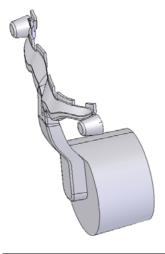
Warpage of the runner. The runner may break from the thick, but still warm and soft parts or at the gate. Before the break occurs, casting is exposed to tensile stresses.
